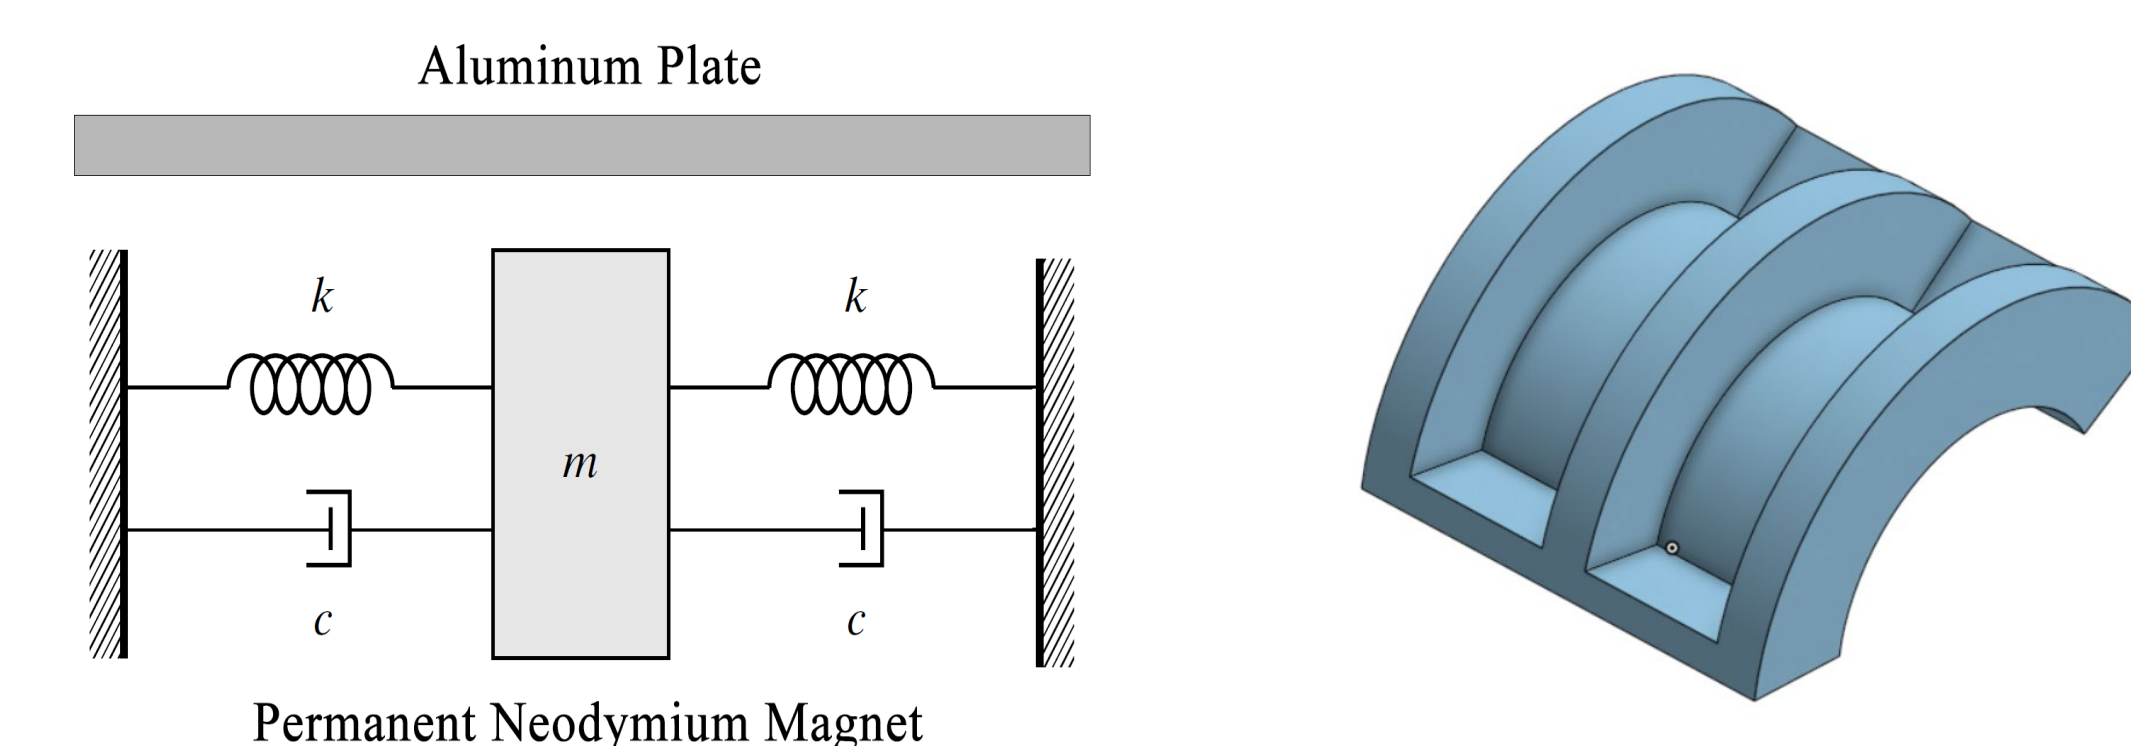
Left) Diagram of the magnet spring system showing the placement of the springs and conductive aluminum plate. Right) Casing for the tremor reduction device
